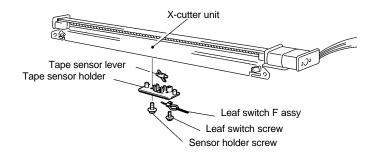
Disassembling the Tape Sensor Unit
